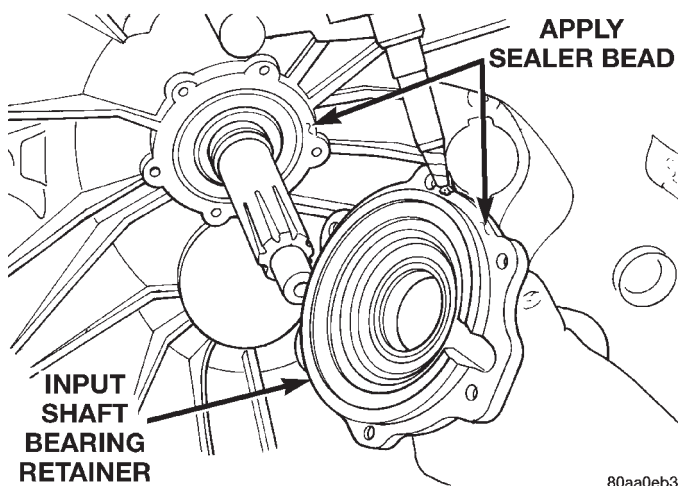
Applying Sealer To Bearing Retainer And Housing
